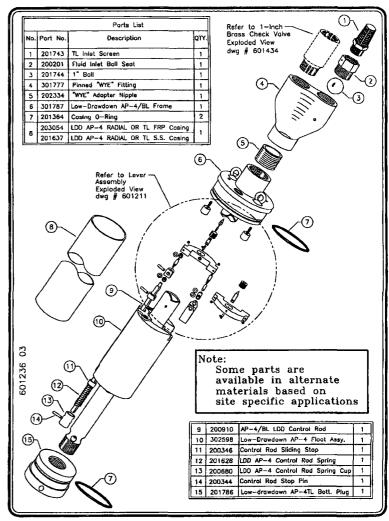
Exploded View of LDD Top-Loading AutoPump AP-4
